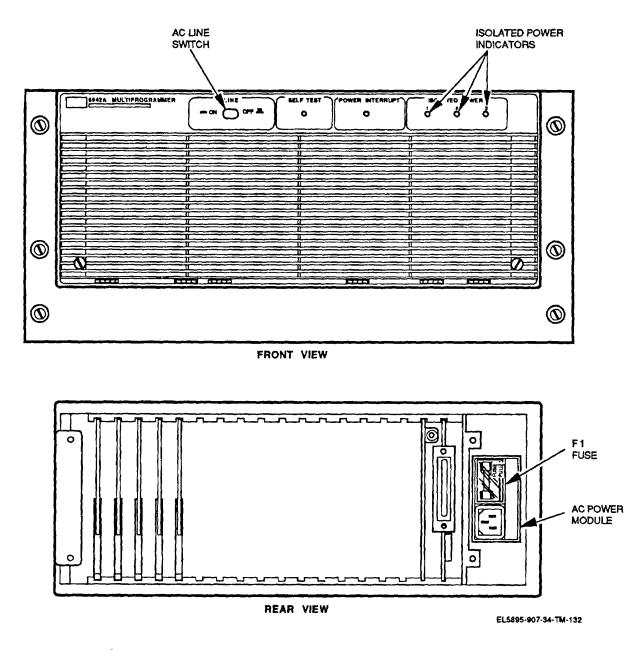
Multiprogrammer 15A11 parts location (sheet 1 of 2).
